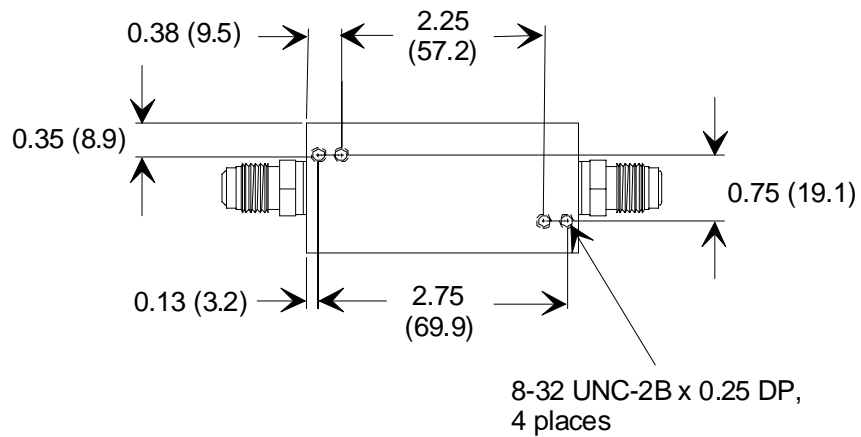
Mounting Dimensions of the 1679 Flow Controller
